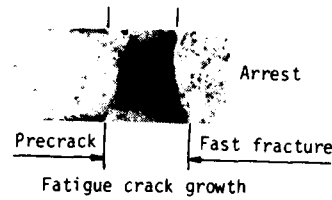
Macroscopic fracture surface showing arrested crack front shape (S10C,  $B=4.0\text{mm}$ ,  $K_h=60\text{MPa}\sqrt{\text{m}}$ ).
